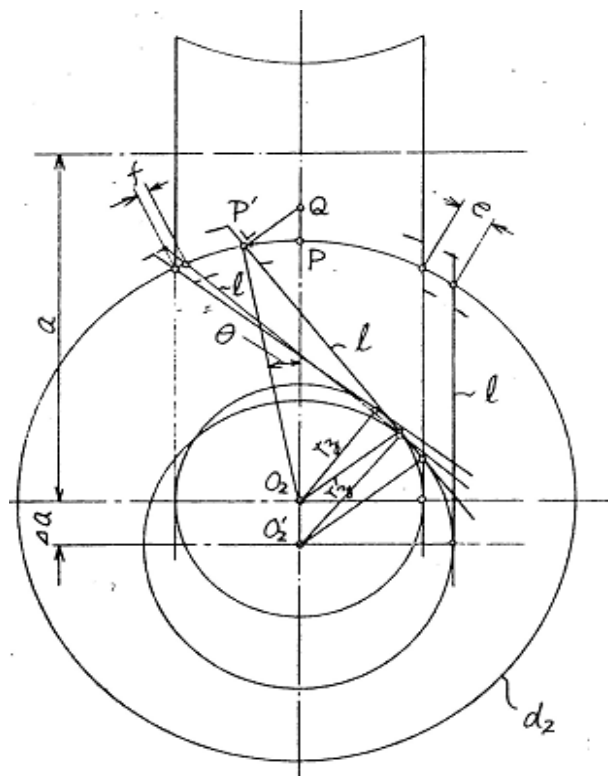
Modifying Hindley Worm cutting method by Ishikawa
